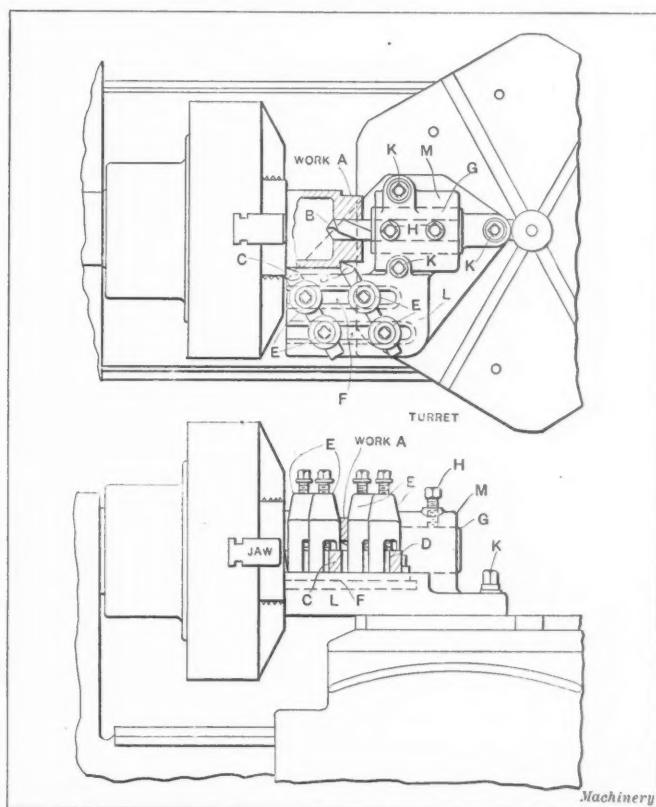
Multiple Tool-holder for the Turntable Type of Lathe
